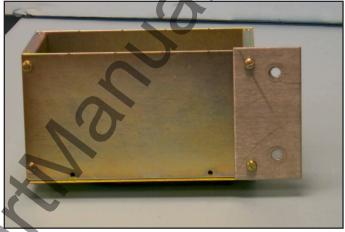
Trip Unit Mounting Bracket Mounted to the Trip Unit Box.
